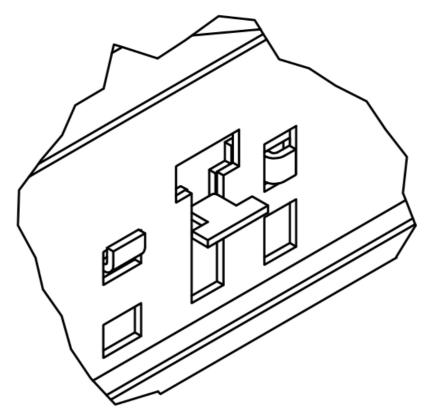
M-MGSI® divider plate – detailed view of the upper and lower plate connection
